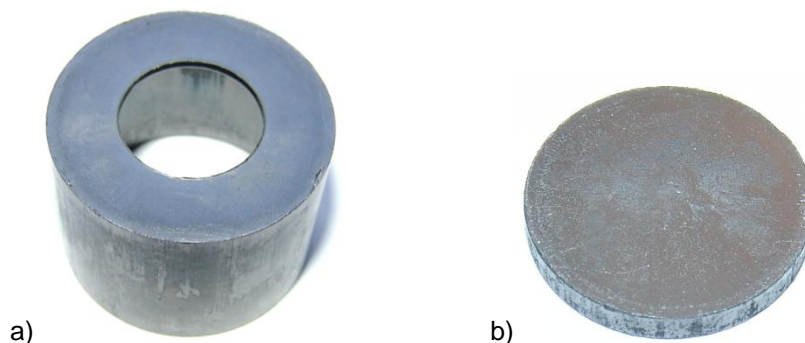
The presented technique leads to smooth, crack-free: a) backward – extruded b) die – upset Nd – Fe – B magnets.
